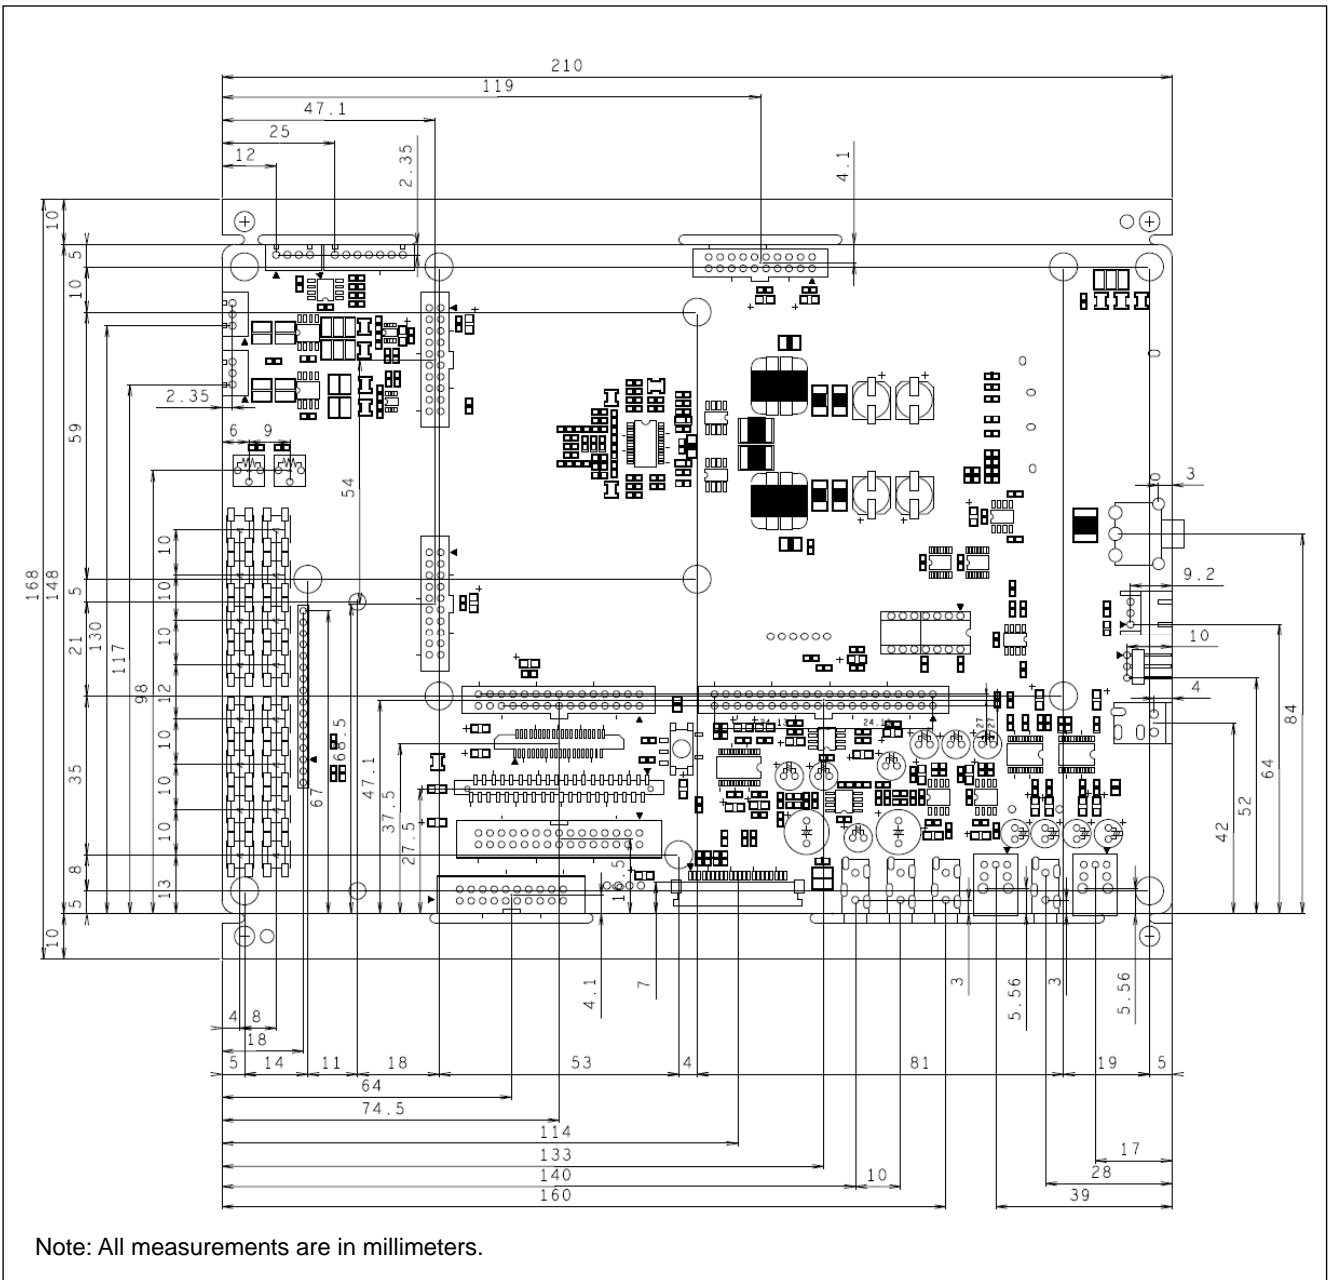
M3A-HS64G01 Dimensions (Top View of the Component Side)
